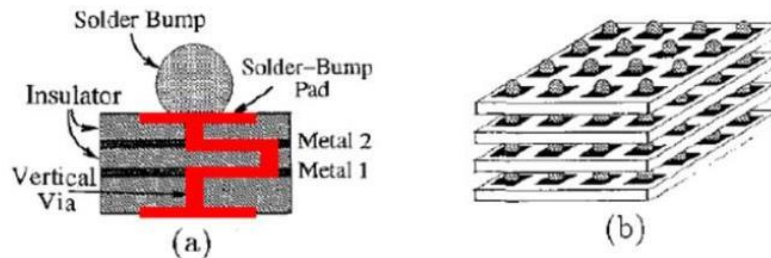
(a) shows vertical metal connections (red) traversing a chip/die with a solder pad and bump on top, and Figure 2(b) shows a stack of chips prior to connection by solder bumps. Ex. 1006, 1.
